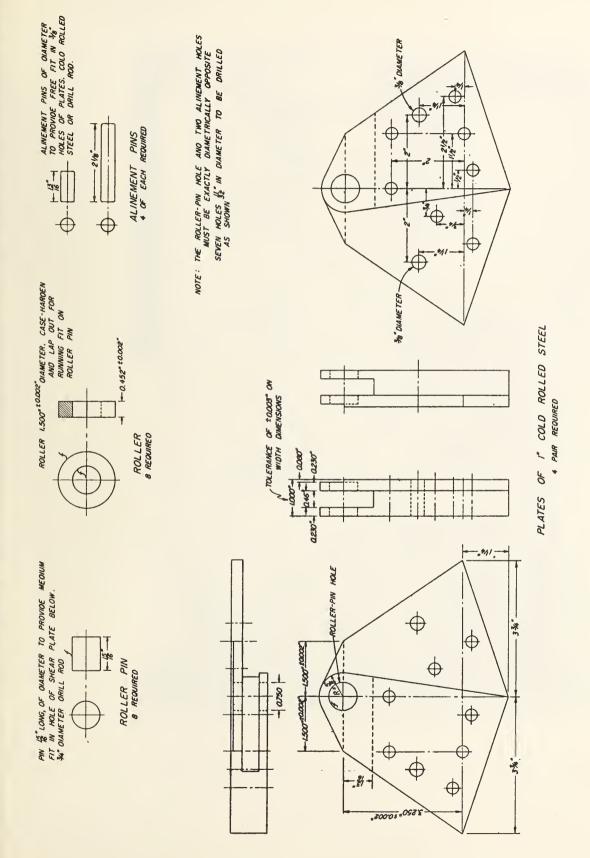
Drawing of 3-inch panel shear apparatus used in testing plastic laminate specimens.
